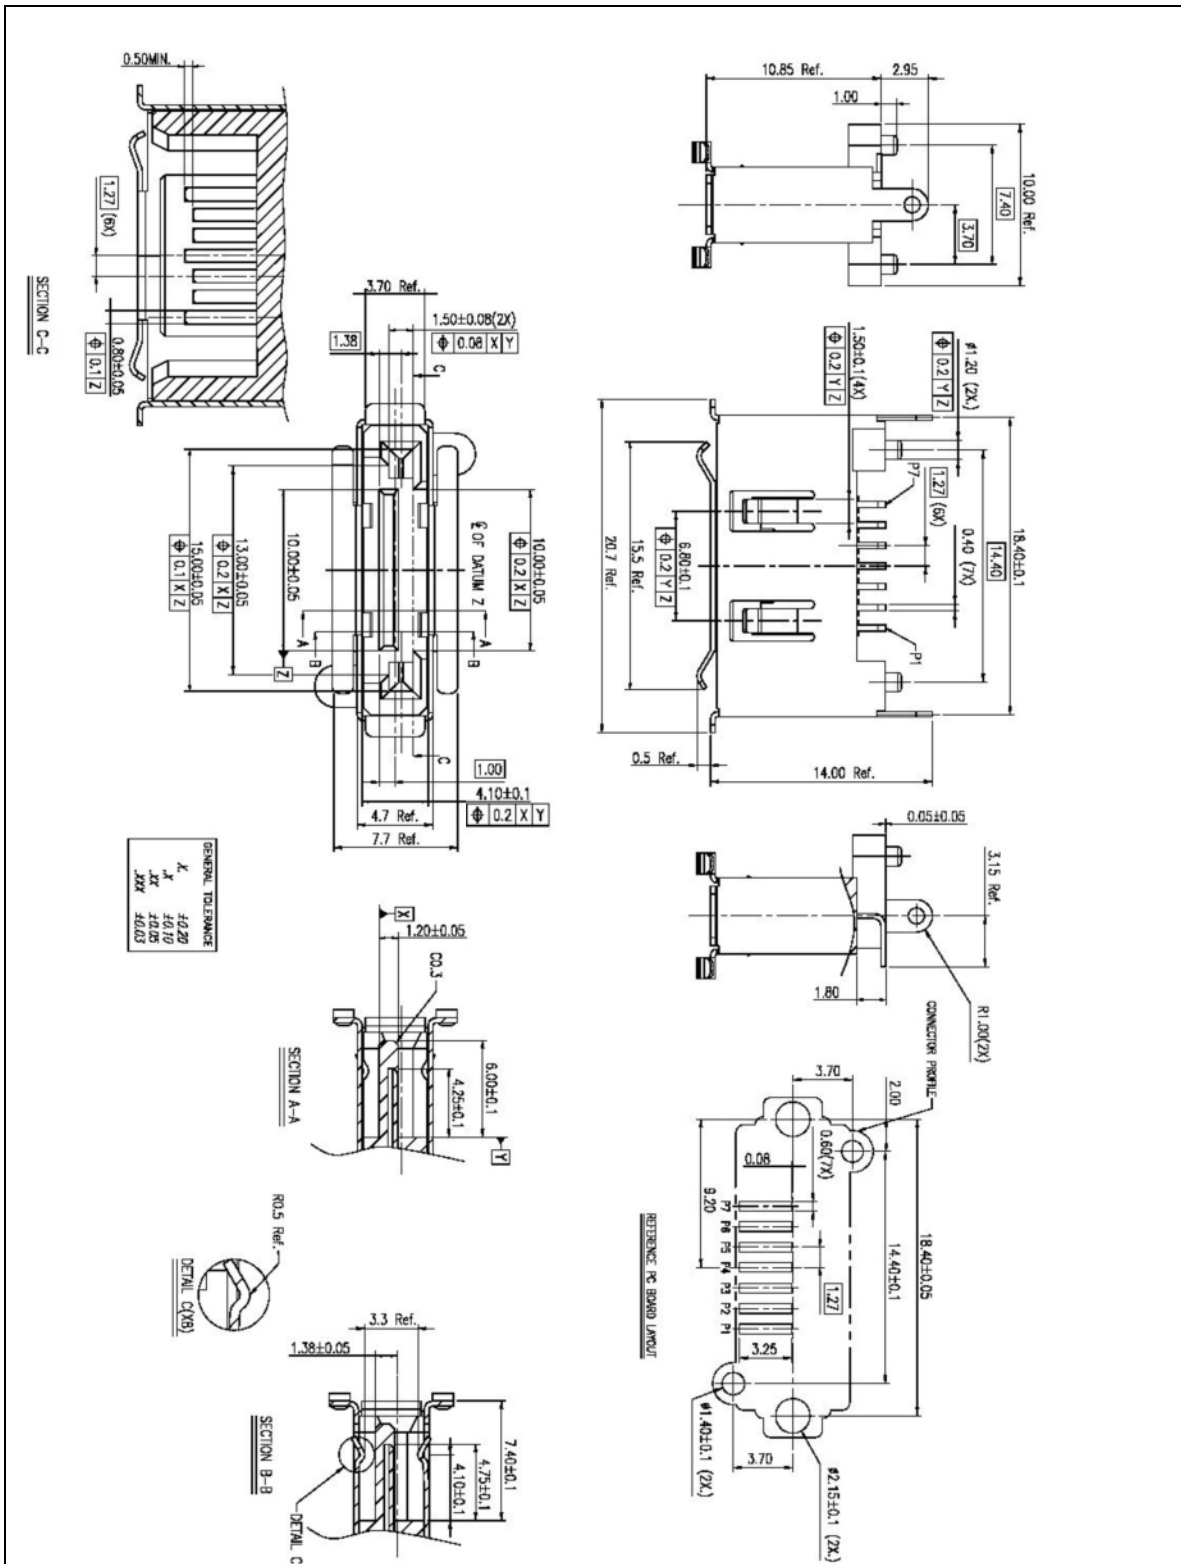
Mechanical dimensions of External Serial ATA Vertical SMT plug
